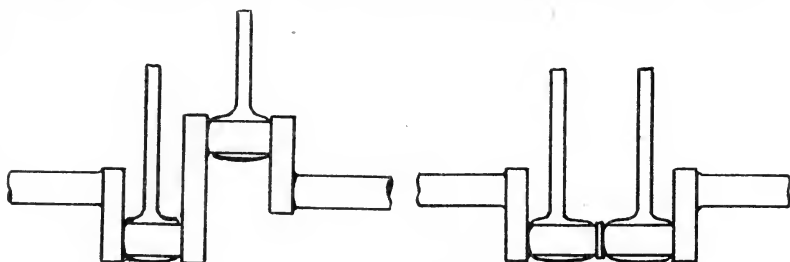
TWO-CYLINDER CRANKS, ALTERNATIVE DESIGNS.
